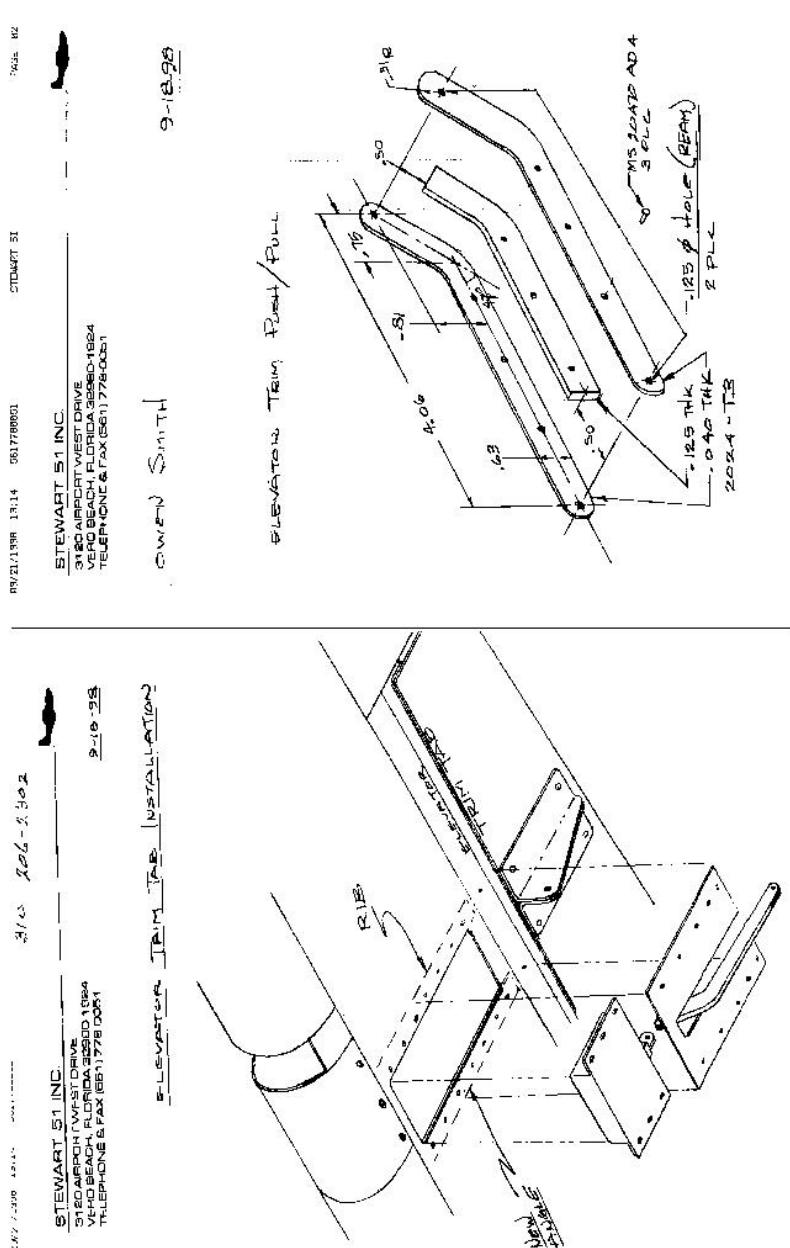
The elevator trim arrangement retrofit to the prototype.
